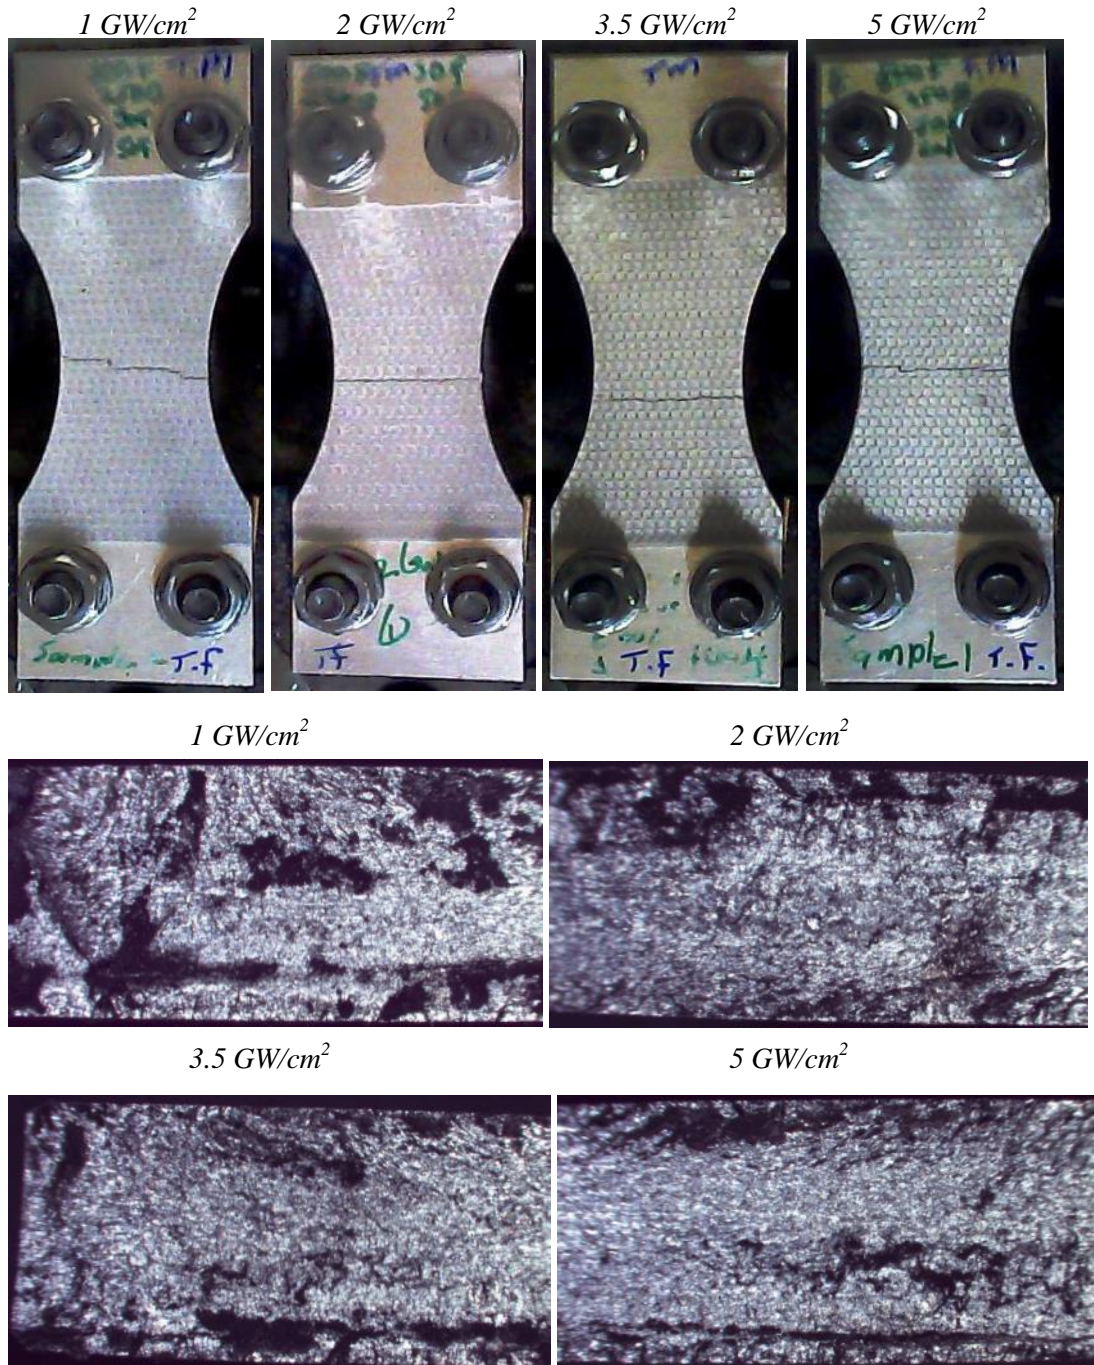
Fracture Position and Surface of the Laser Shock Peened Base Material
